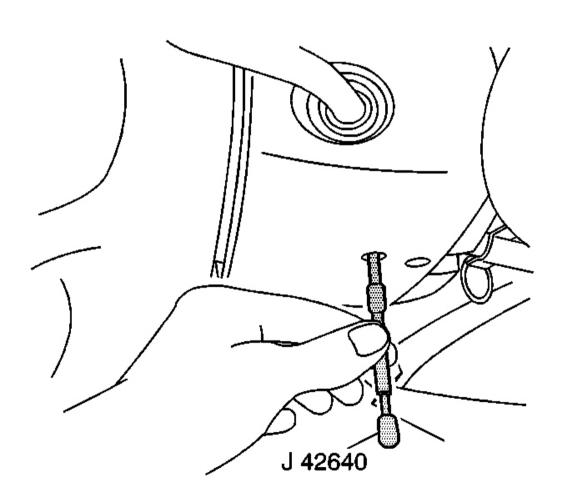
Inserting J 42640 To Lock The Steering Column Courtesy of GENERAL MOTORS CORP.
